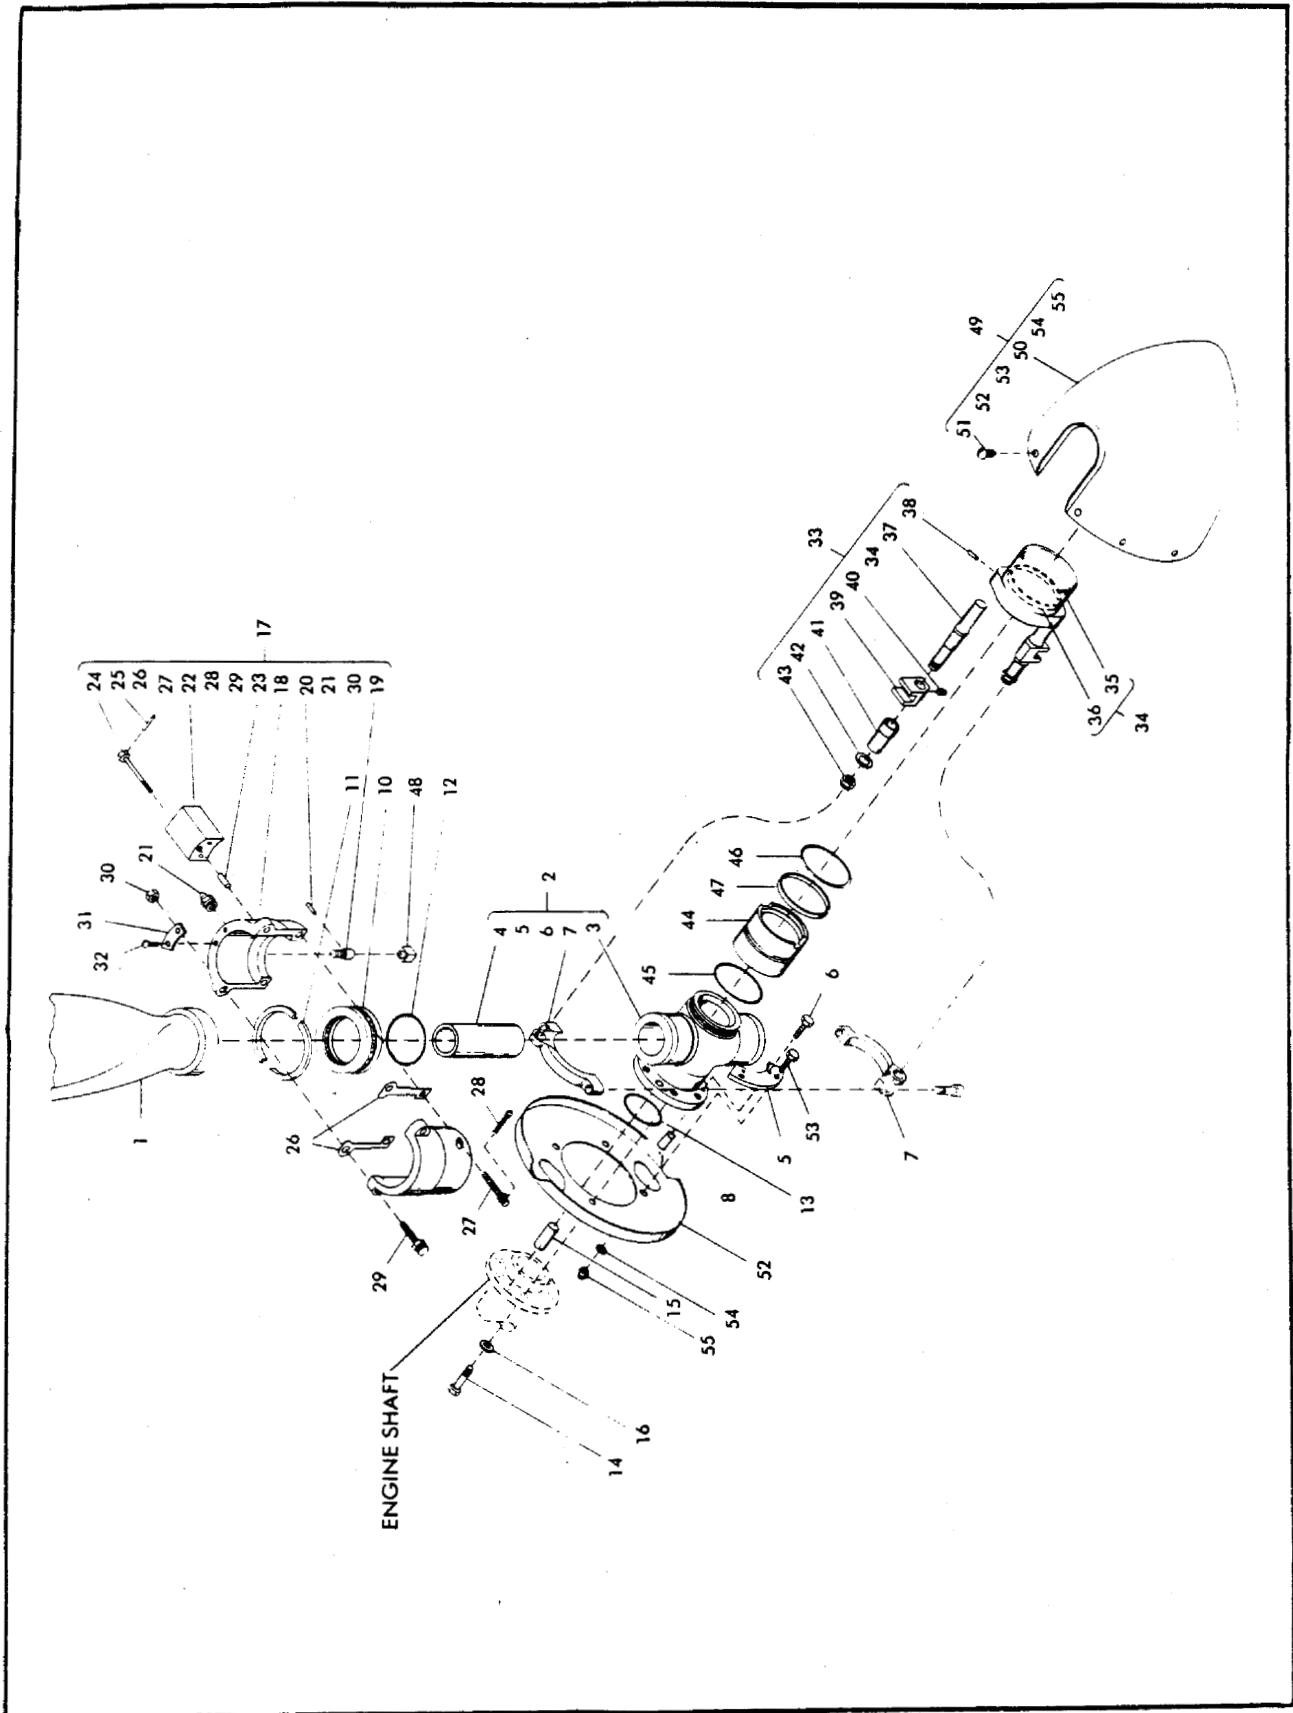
Model BHC-92ZF-1D1 Propeller - Exploded View
